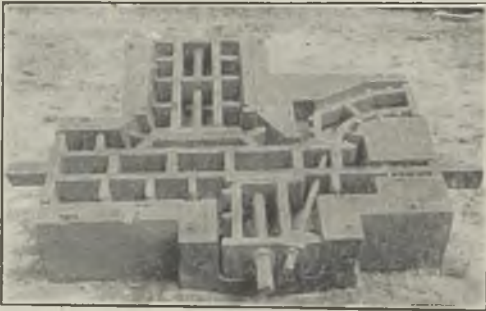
CORE BOX AND IRONS USED FOR ONE OF THE CASTINGS SHOWN IN FIG. 14.
